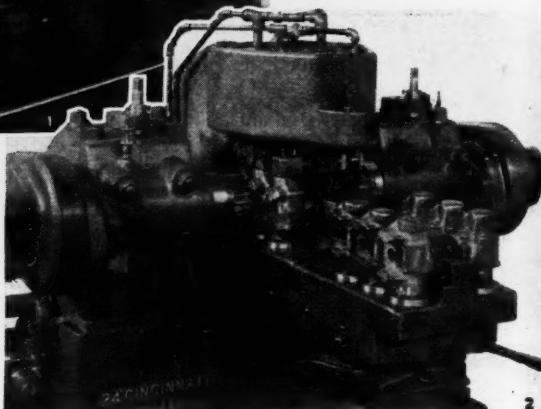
Four pieces are held in each end of this fixture, and are clamped by hand. Time per piece, .205 min.
